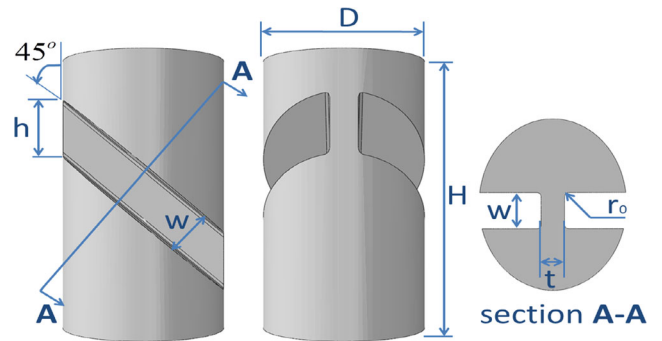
An SCS specimen with a rectangular gauge. a. Front view b. Side view. c. A cut view (A-A) perpendicular to the gauge inclination
